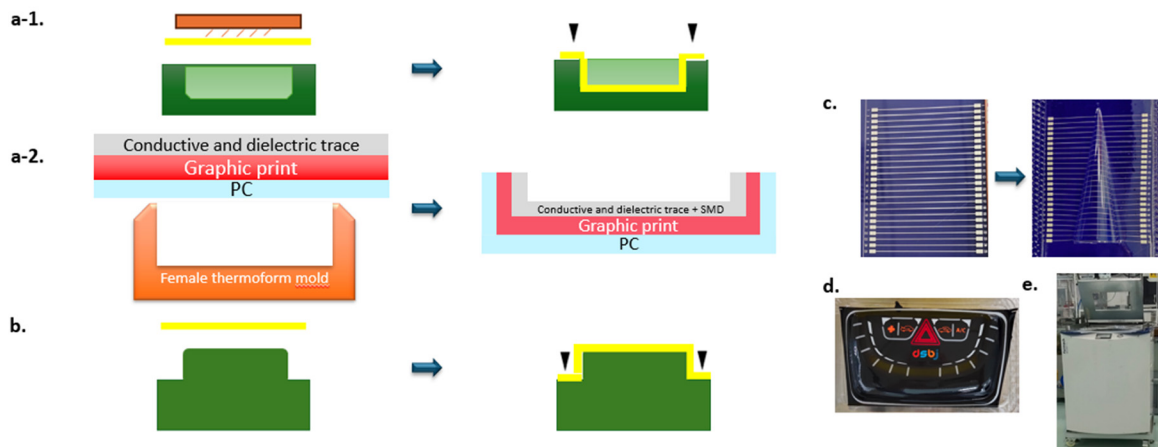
(a-1) Thermoforming in a female mold; (a-2) Thermoforming of printed circuitry in a female mold; (b) thermoforming in a male mold; (c) printing on flat polycarbonate substrate and thermoformed into cone-shape; (d) graphics with thermoforming; (e) thermoform equipment Formech, Singapore.
